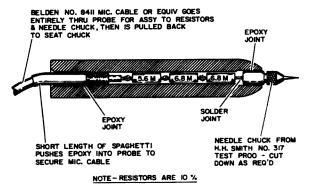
Test prod construction. Simple design is permanently assembled with epoxy cement.
